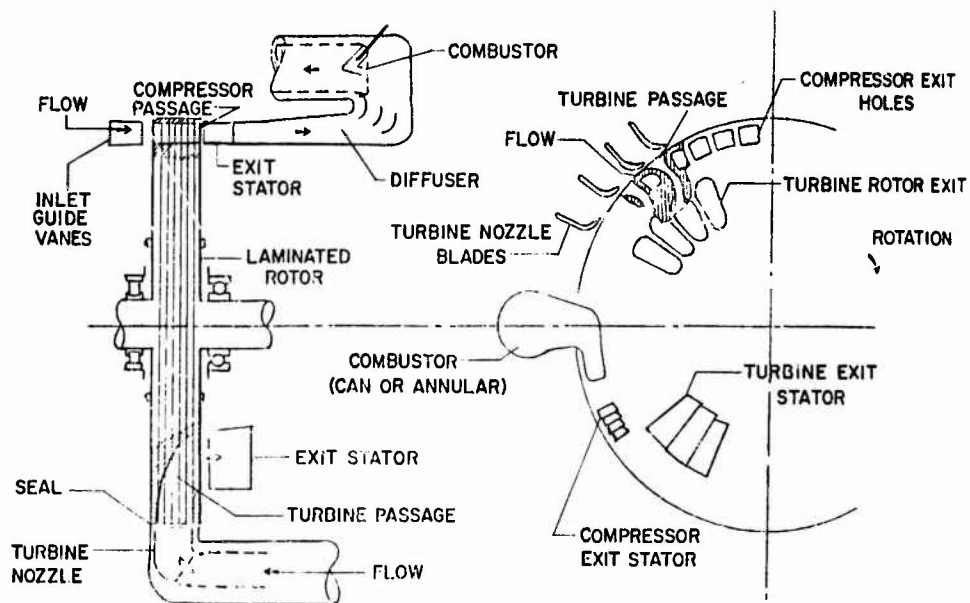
Schematic of Curtiss-Wright Single-Rotor Gas-Turbine Engine
